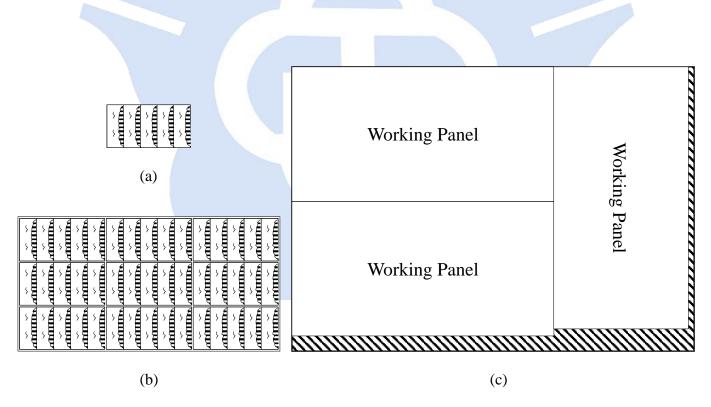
(a) A Shipping Panel with five PCB pieces, (b) a Working Panel with nine Shipping Panels and (c) a Core Board which can be cut to three Working Panels and the waste of trim loss on the slash area.
